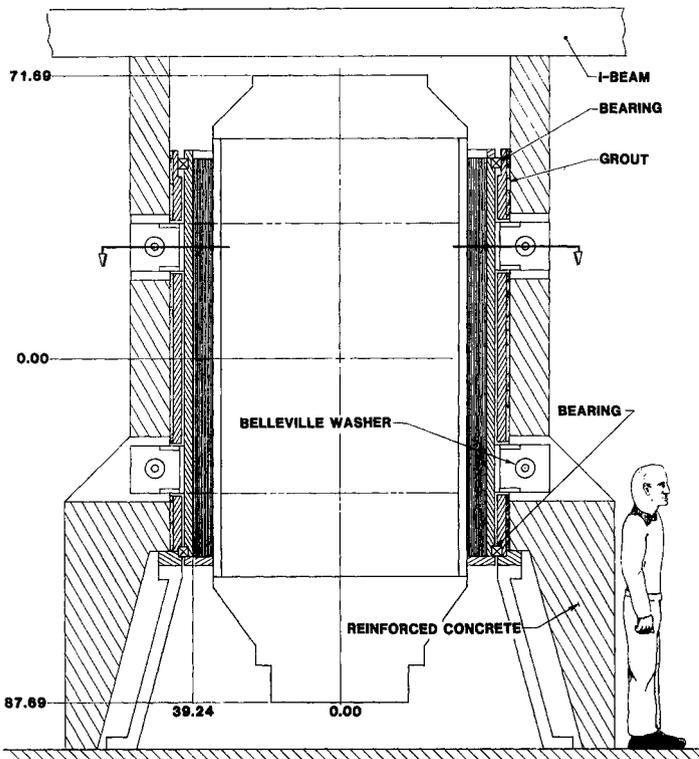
10-MJ ARFC flashlamp driver in torque frame
